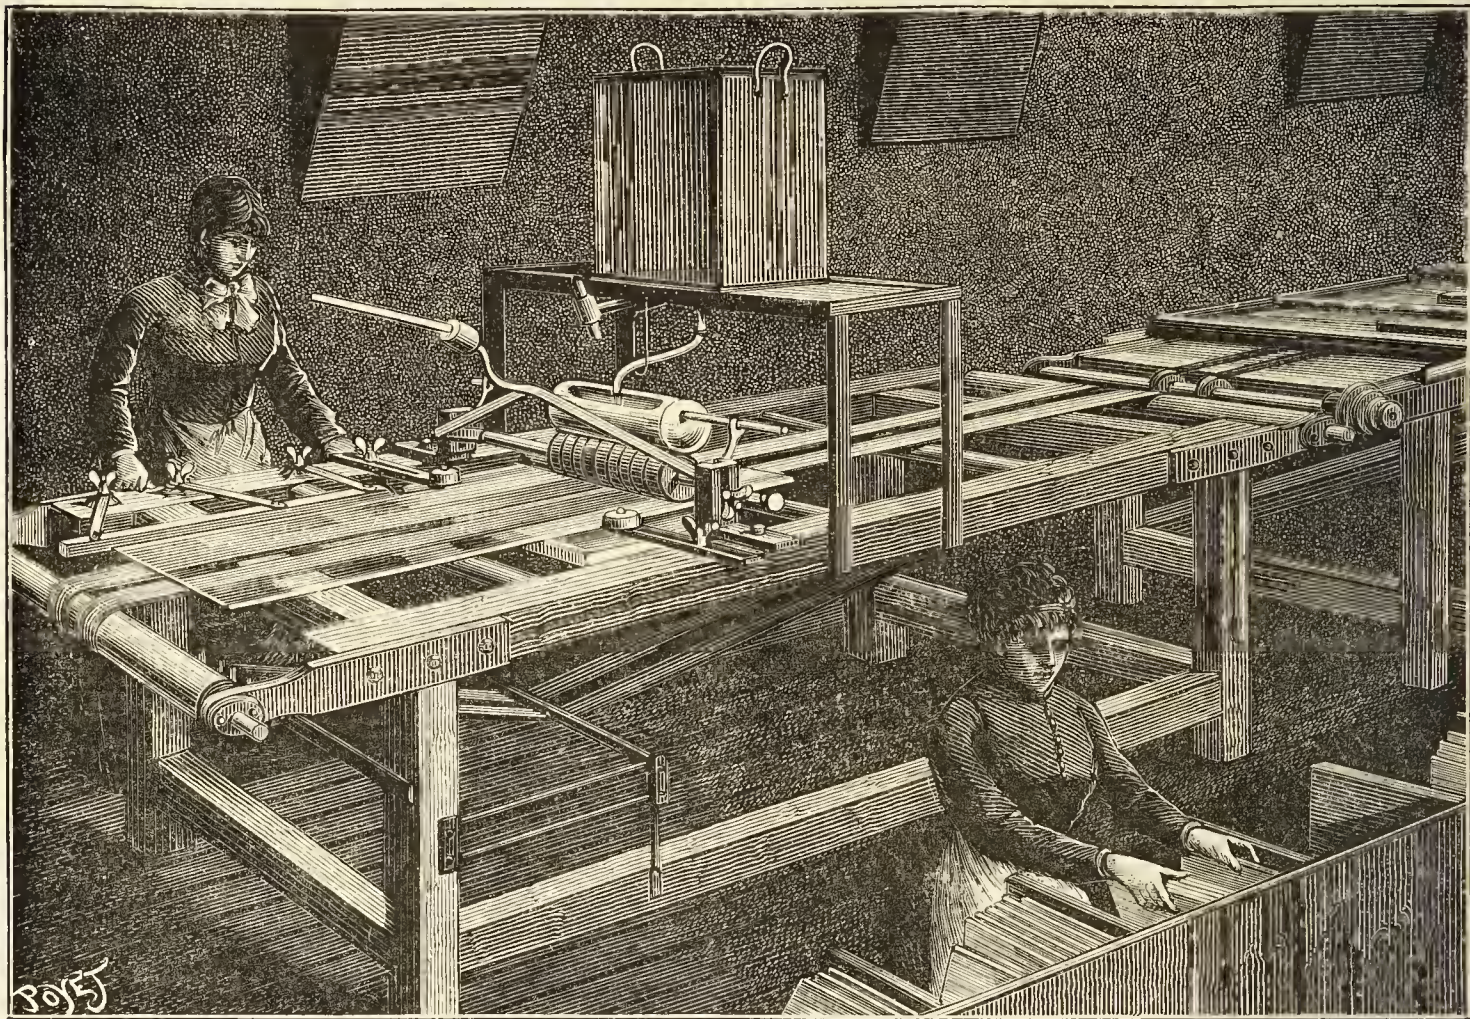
Machine for Coating the Glass Plates with Emulsion.
